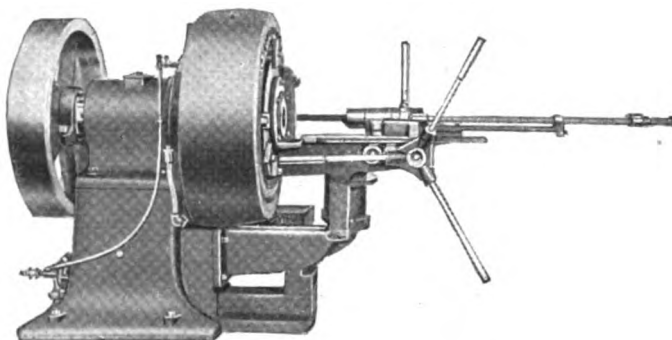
No. 6HS6 Hot Swaging Machine with Holder
